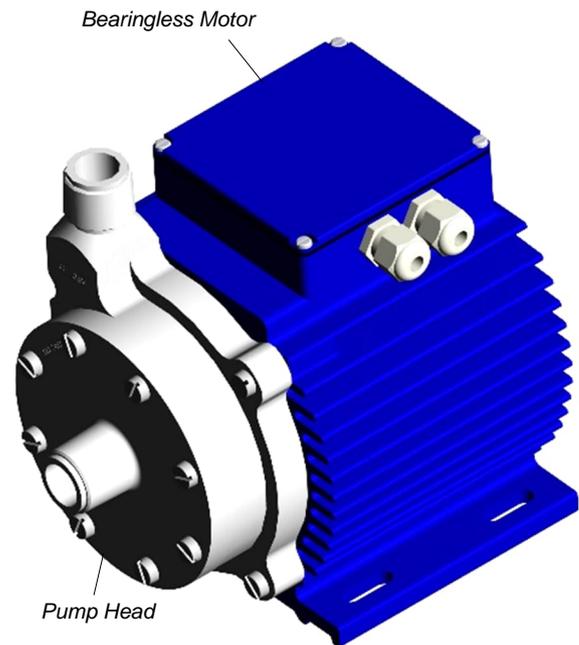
Cross-section of the bearingless pump motor and pump head LPP-2000.4 (PVDF)
